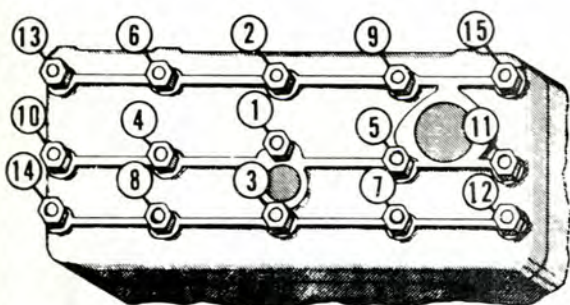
Cylinder Head Stud Nut Tightening Sequence
